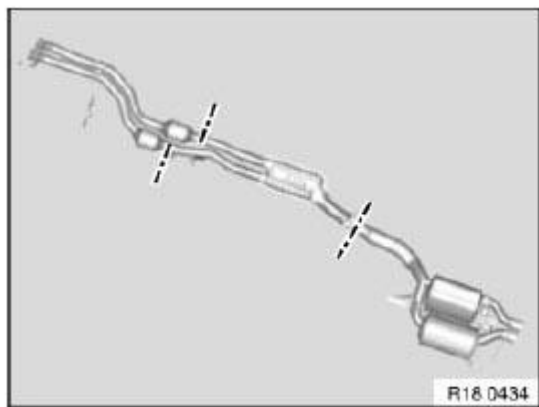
Identifying Centre Muffler Lines Cutting Point
